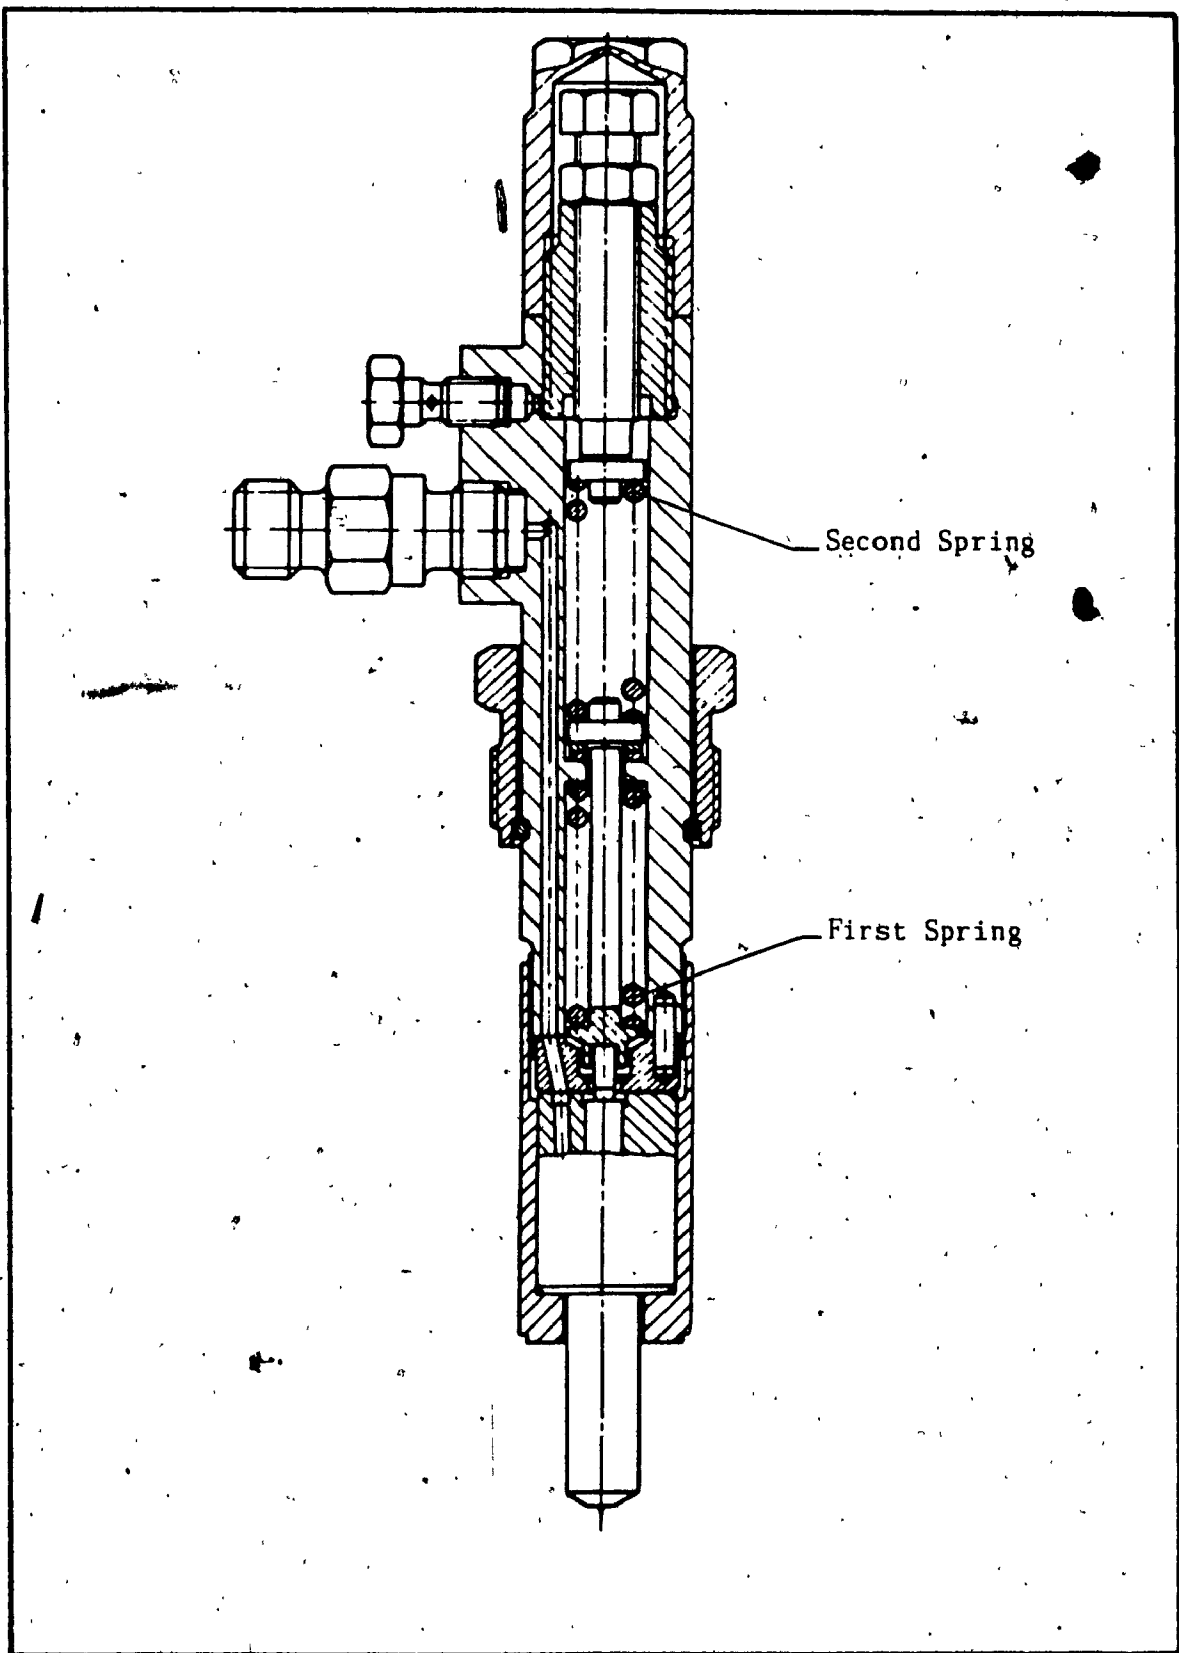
Drawing of Two-Spring Injector (Ref.[1])
